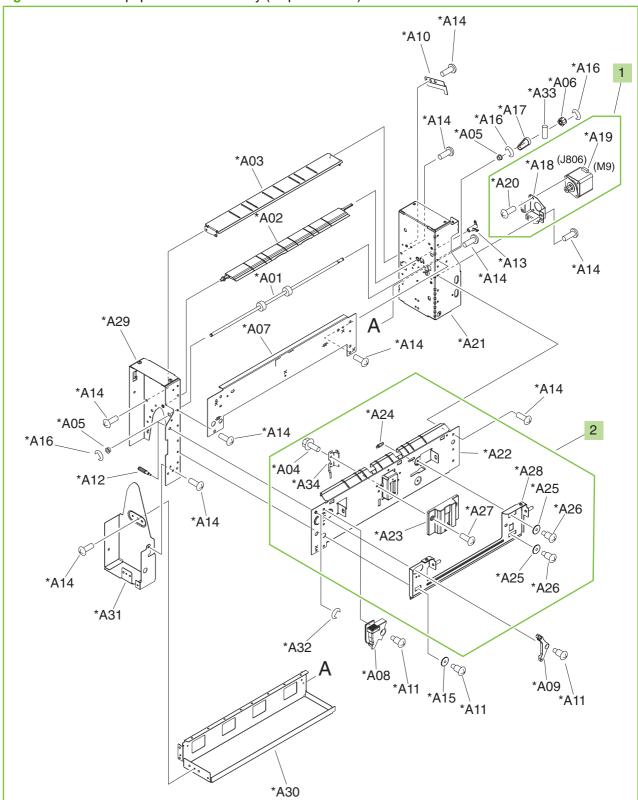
Saddle paper-feeder assembly (stapler/stacker)
